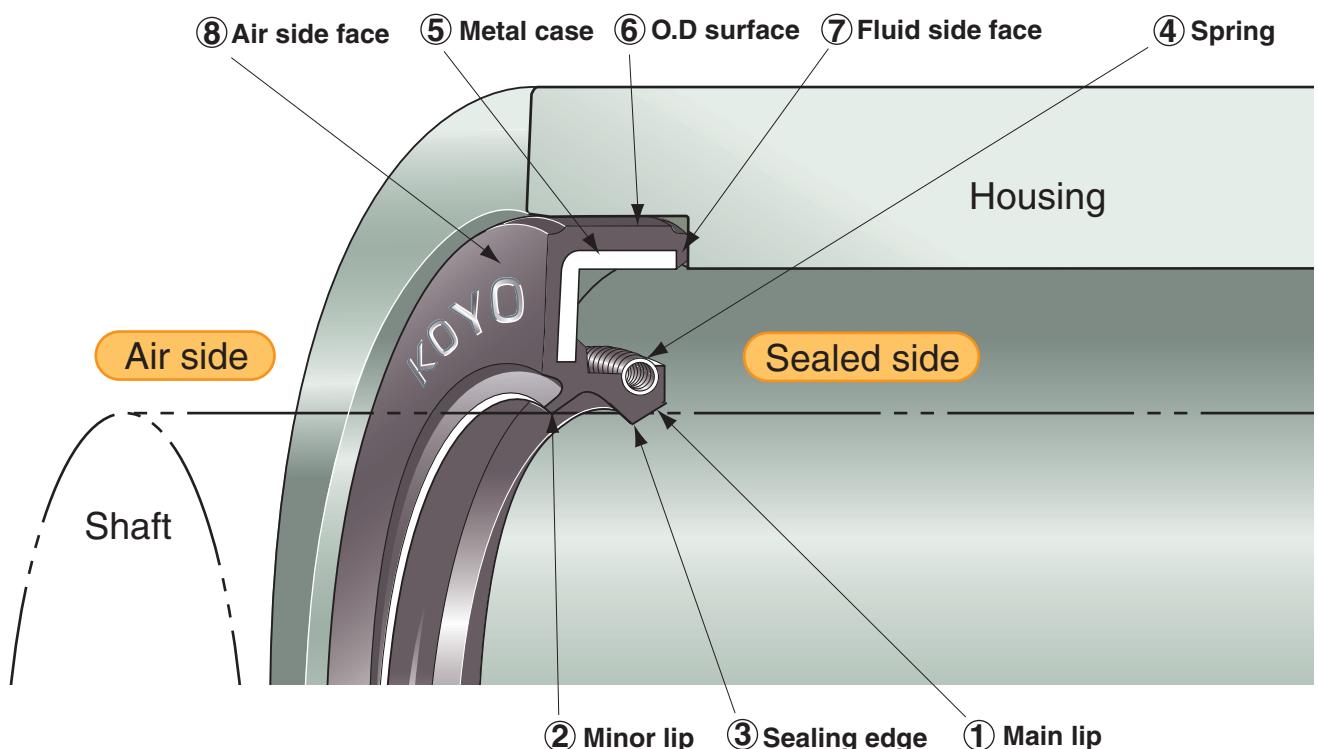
Typically shaped oil seal and component nomenclature
